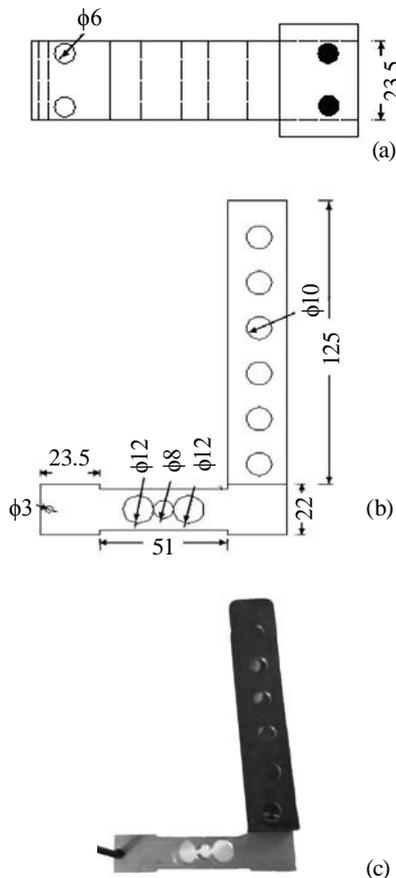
(a) Top view (b) Front view (c) Pictorial view of U-shaped frame with load cell
